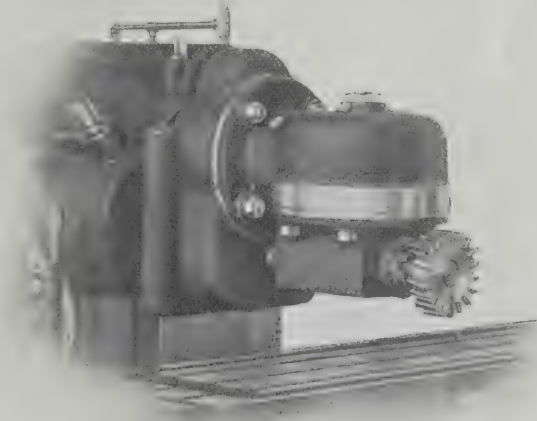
Using the Attachment for Horizontal Milling at a Slight Angle with the Axis of the Main Spindle
